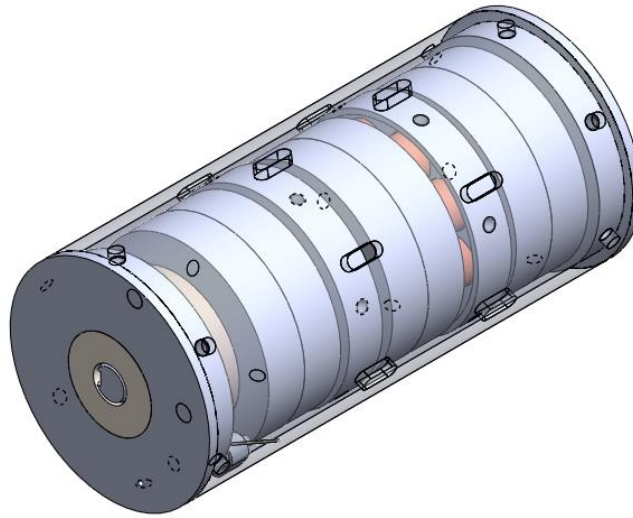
CAD Assembly of the GEN Rev 3 (shown with a transparent outer tube and the radial screws not placed)
